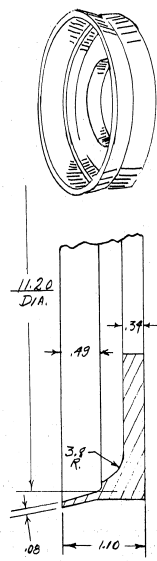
P/N 226963 - Rear Flange, Rear main Bearing Support Cone Assembly, Material Ti-A-70.
